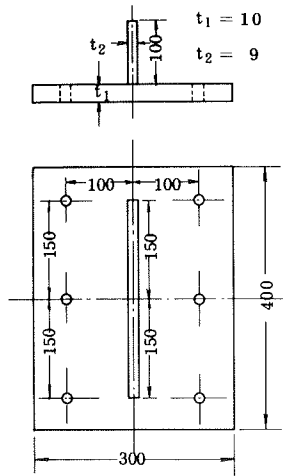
Specimen for test of fillet welding under vibration.
